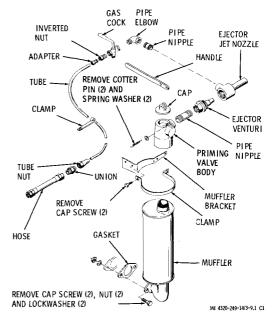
Muffler and exhaust primer, disassembly and reassembly (serial numbers 449593 through 449657).
